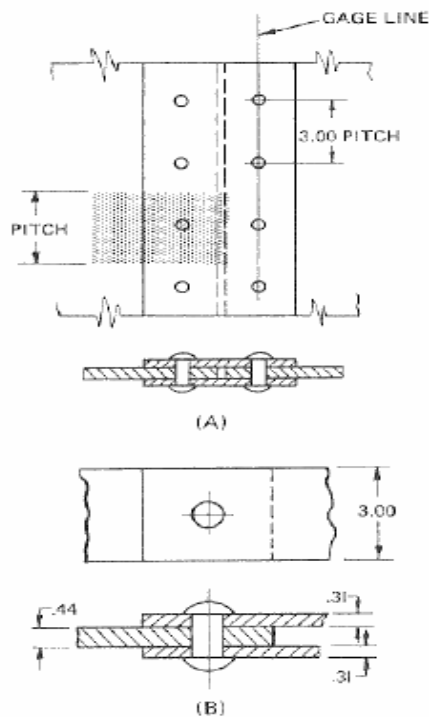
Single-riveted butt joint on a boiler.
